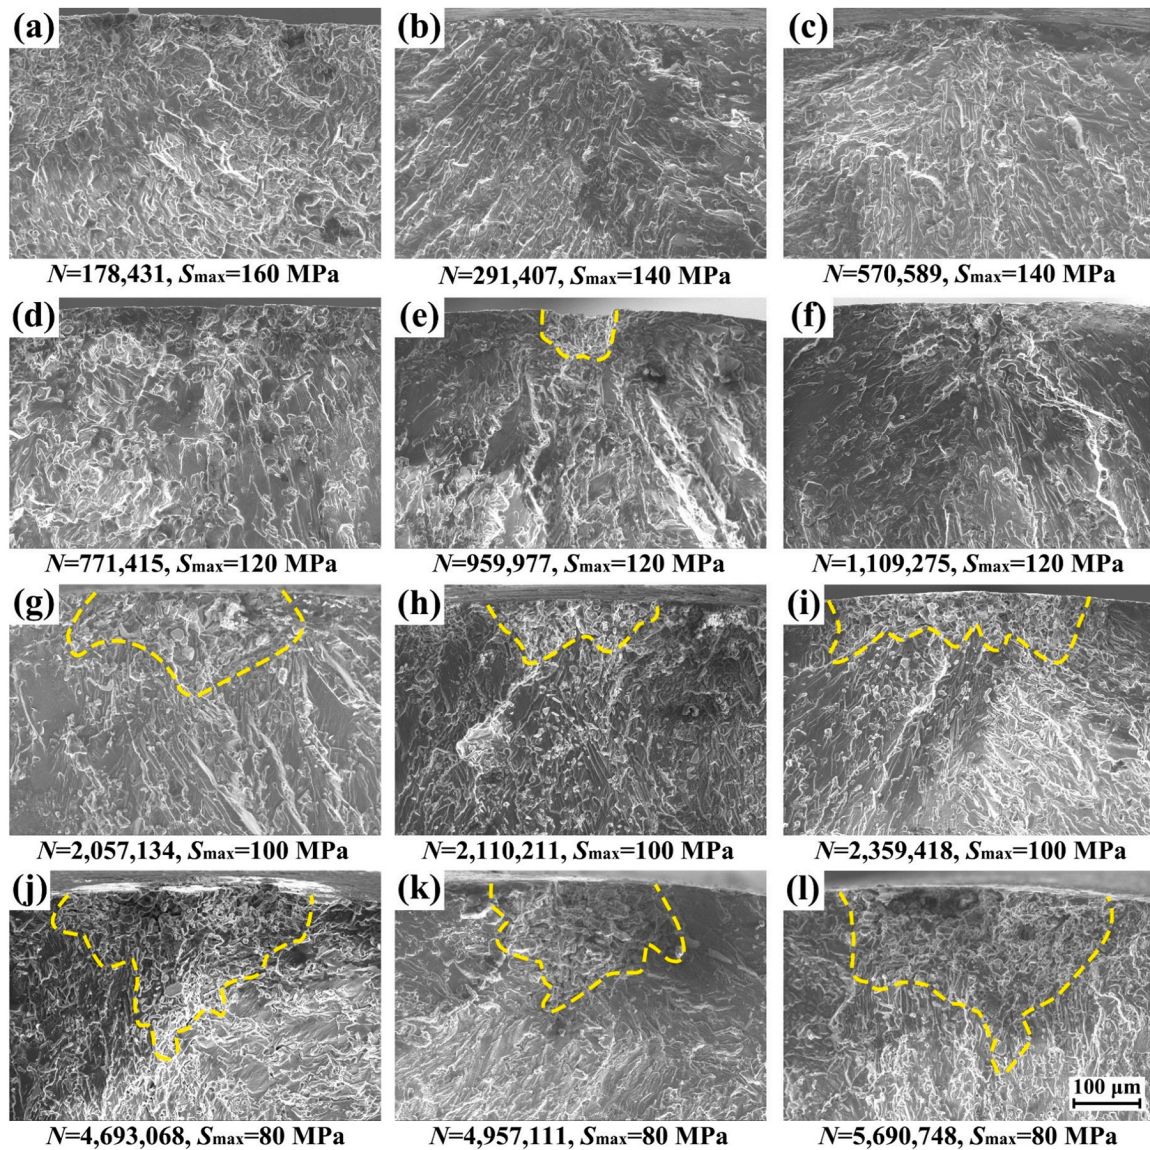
Fatigue initiation regions of the CF-A360 specimens. (a-l) refer to each of the fractured specimen with the fatigue initiator outlined
